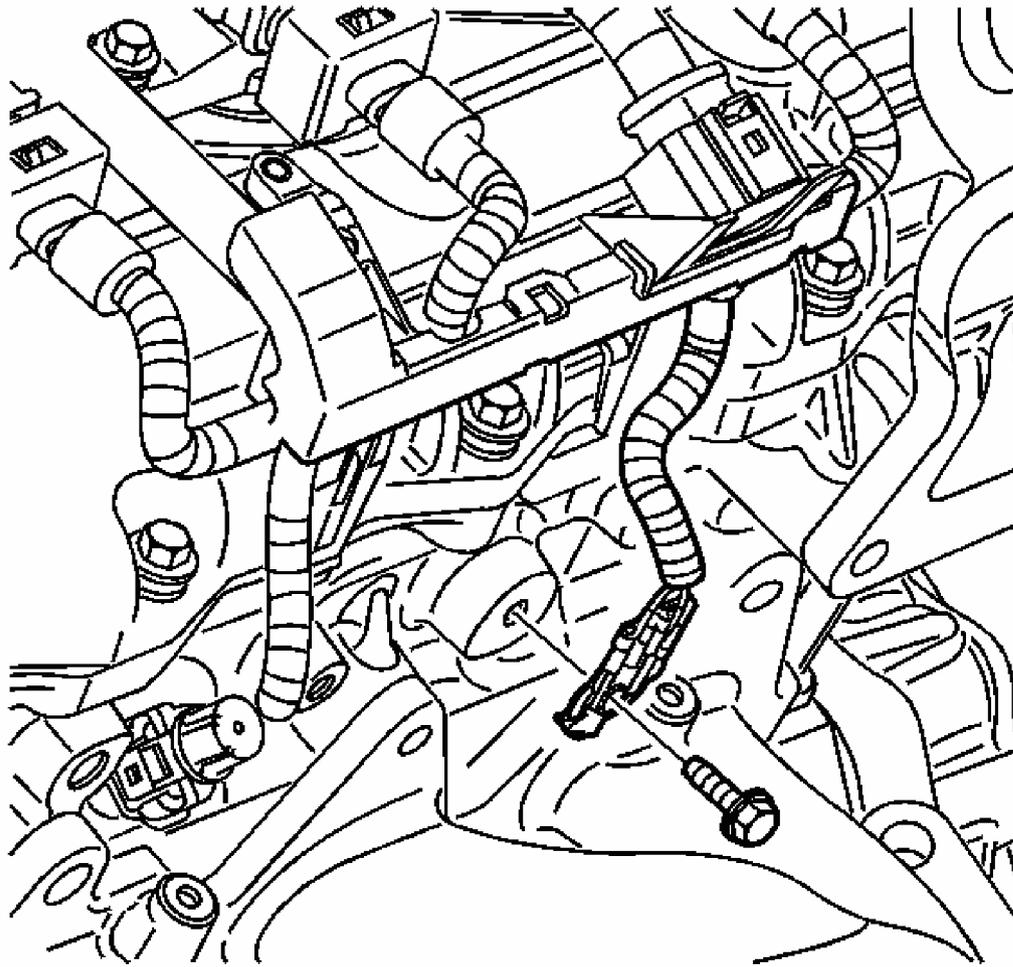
View Of Left Cylinder Head Wiring Harness Ground Bolt
